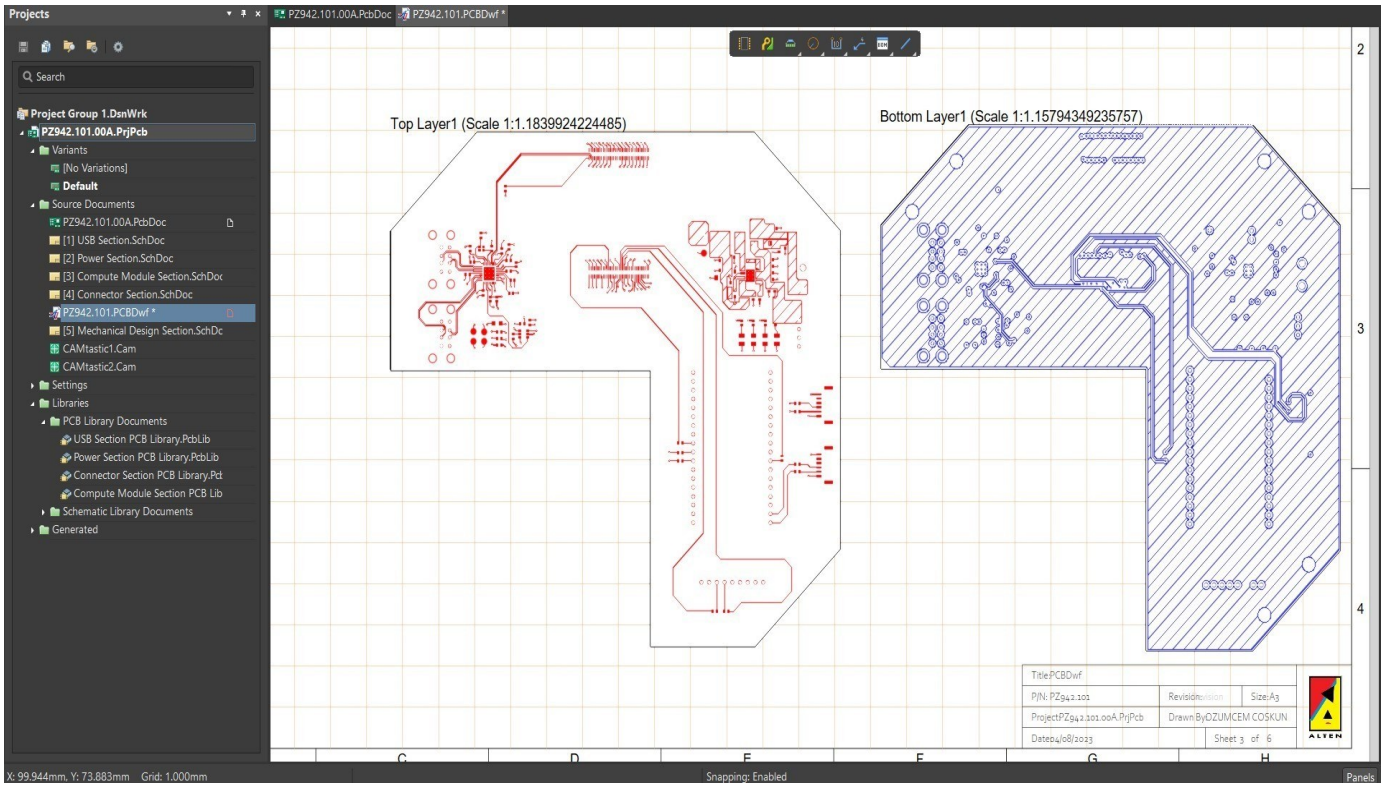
Top-Layer and Bottom-Layer Scales of PCB
